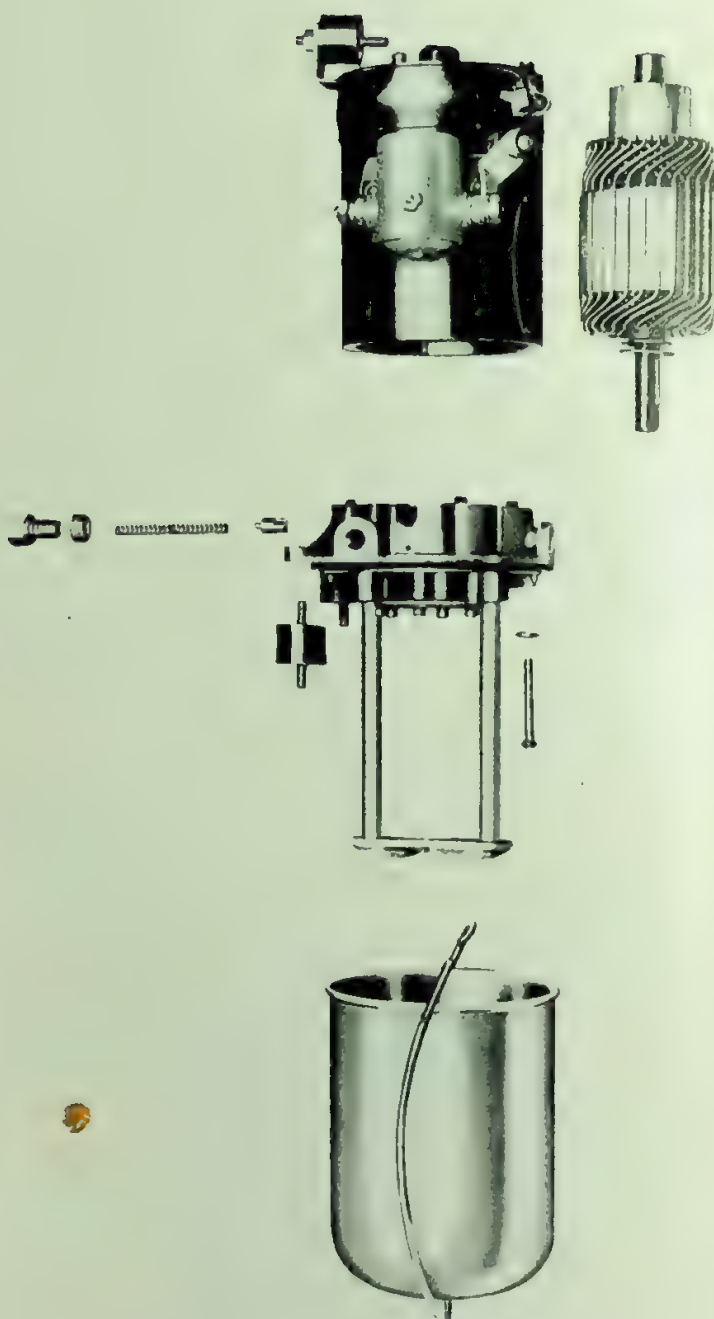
Exploded View of Hydraulic Pump Unit. Note Pump Assembly Regulating Valve Position.
